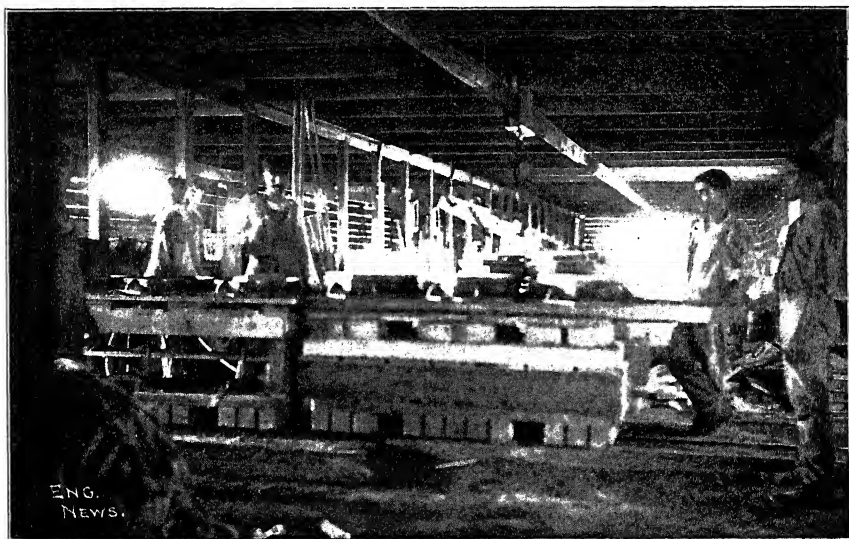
Interior View of Curing Shed, Showing Overhead Trolley Tracks and Molds.
